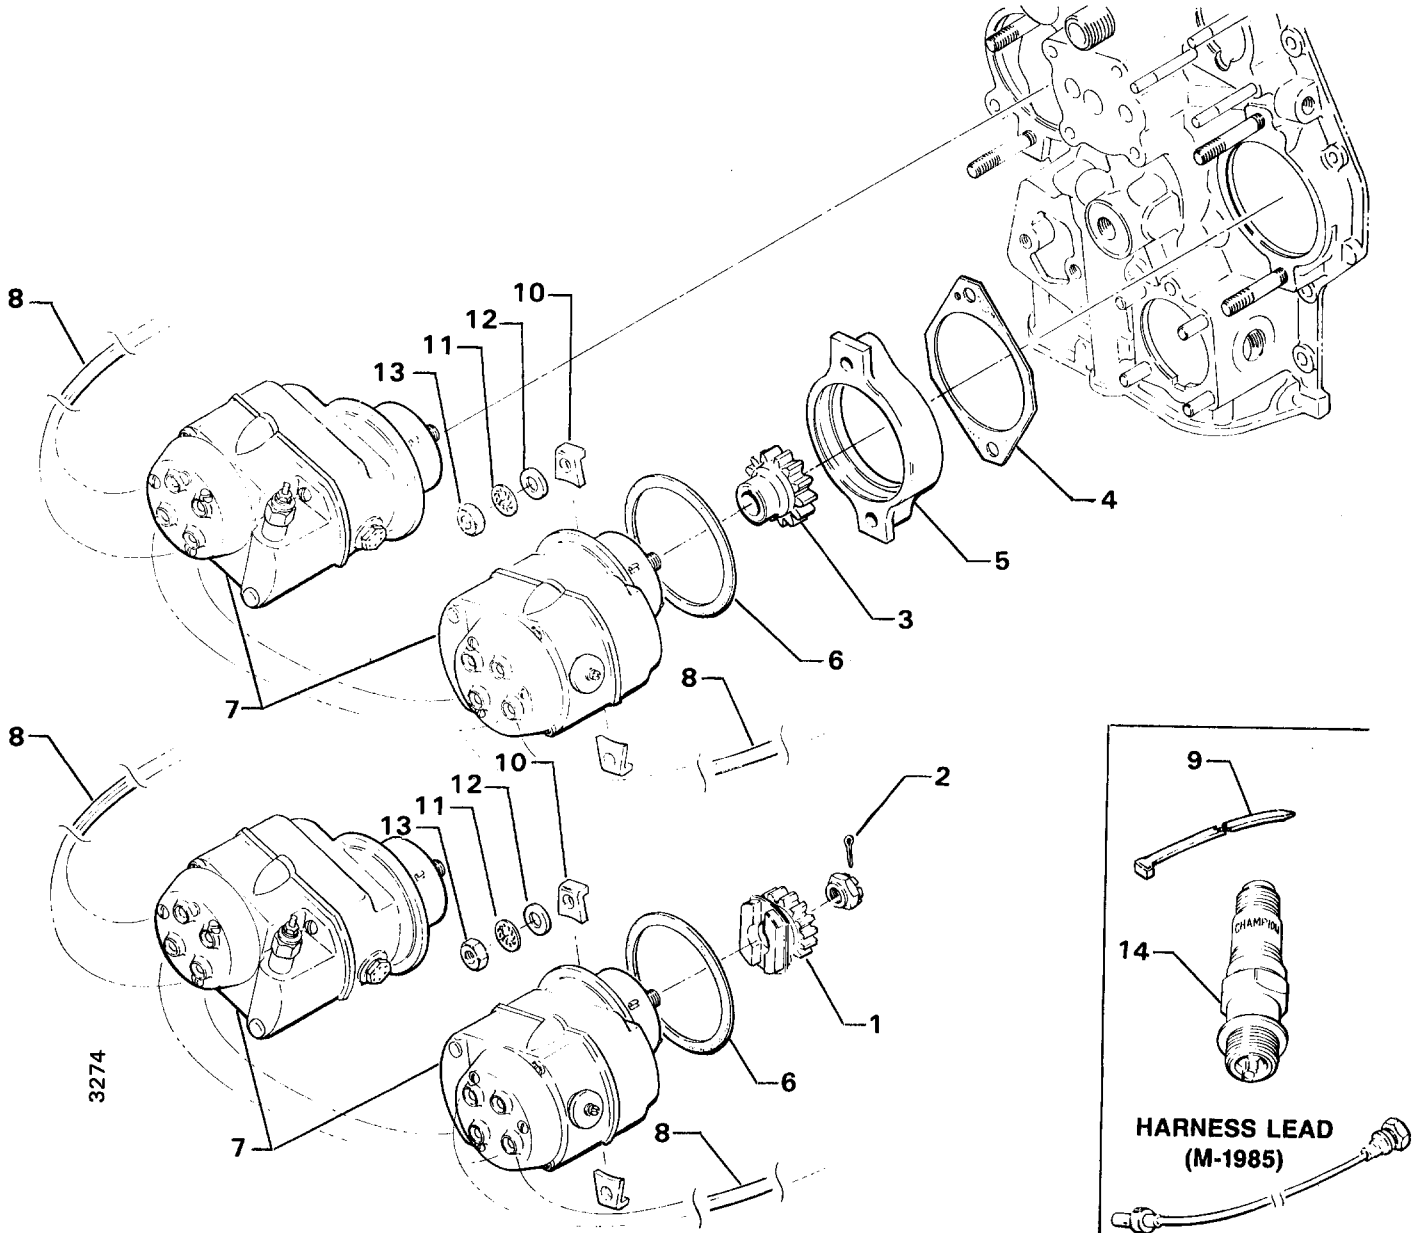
MAGNETOS, MAGNETO DRIVES AND SPARK PLUGS
